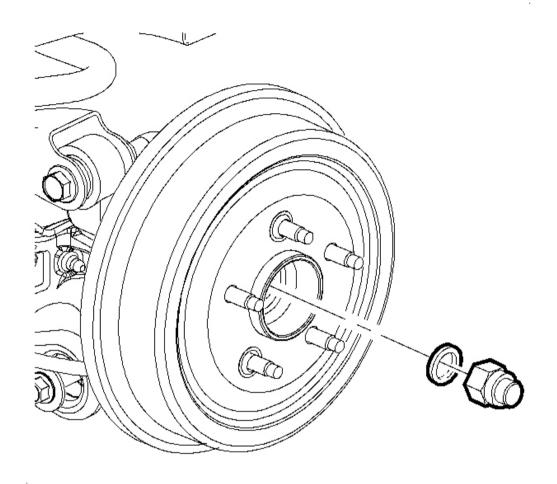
Rear Brake Drum & Wheel Drive Shaft Spindle Nut Courtesy of GENERAL MOTORS CORP.
